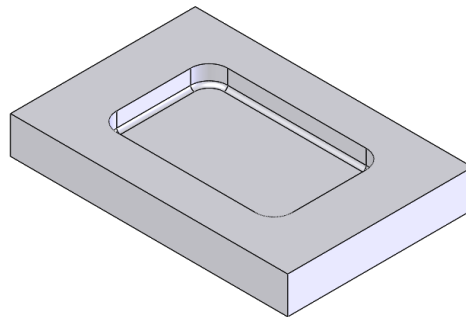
Plate shown in the *Pocket Milling* configuration
